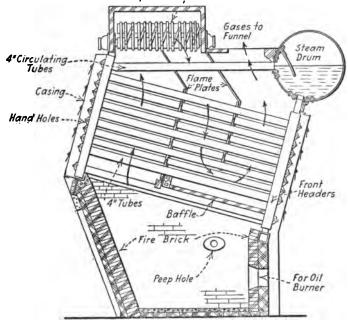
Cross-section of B. & W. Boiler-oil Burner
